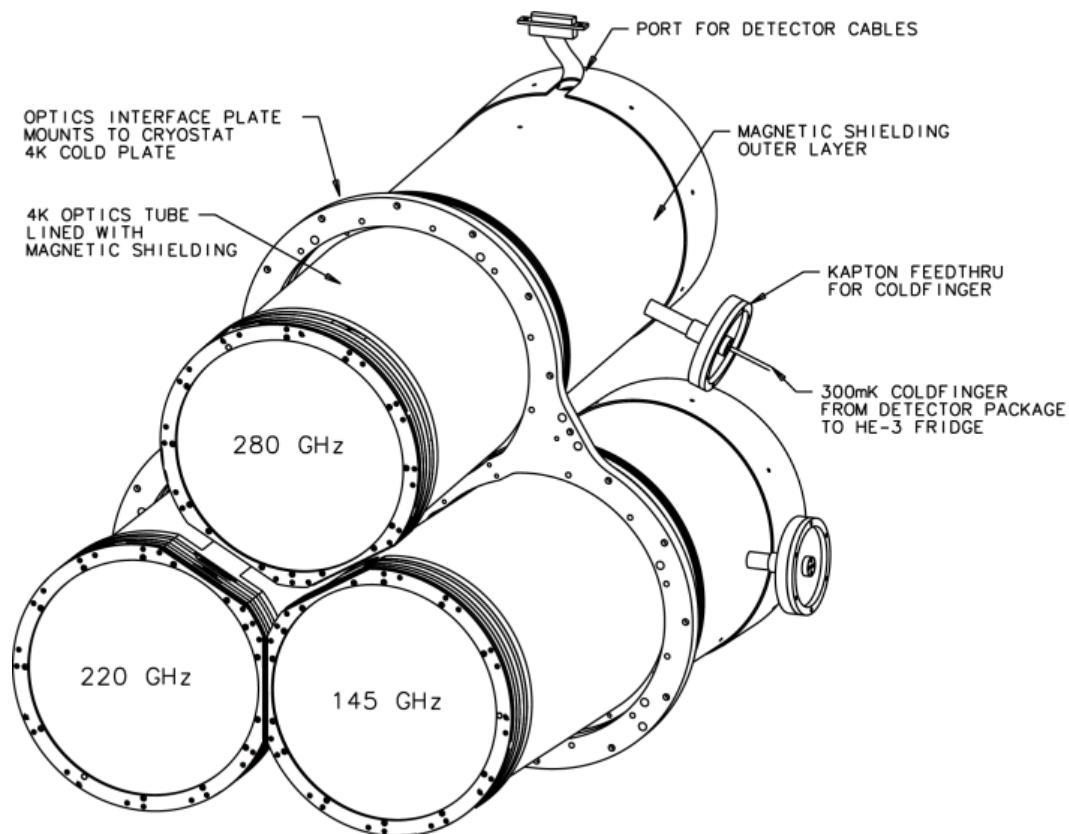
Outside of the assembled three-tube mechanical structure. Figure courtesy of R. Thornton.
